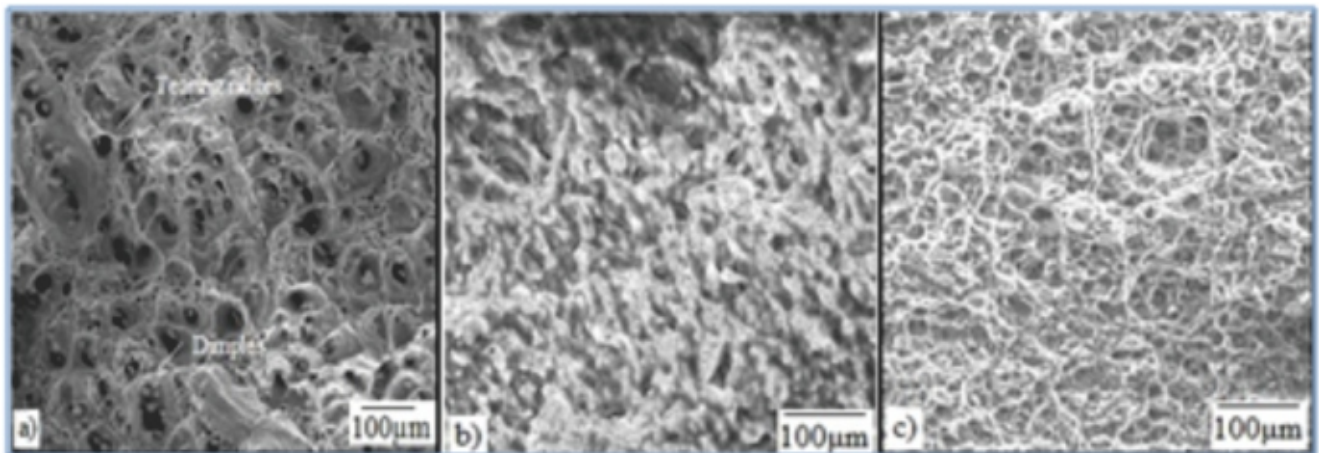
SEM Fractographs of fractured SCC samples of welds with B₄C nano powder addition: (a) As-welded, (b) PWHT-T6 and (c) PWHT-RRA
